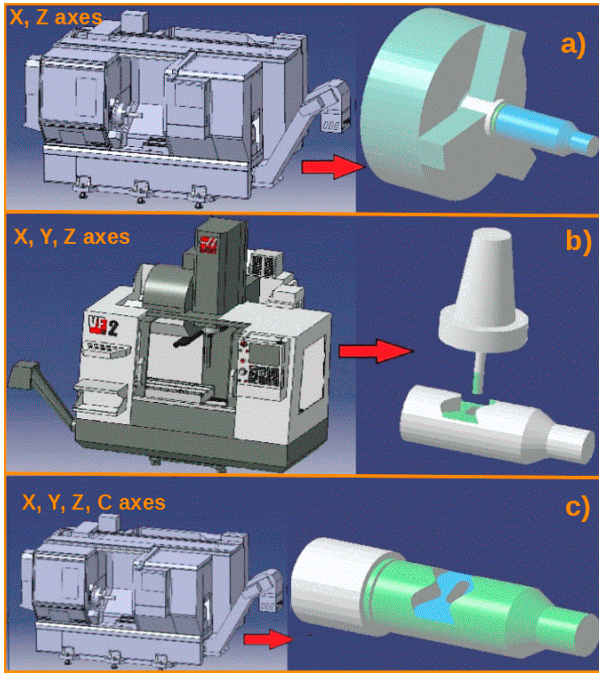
TTP vs. combined process (turning + milling): a) turning using lathe, b) milling, c) combined turning + milling using one machine tool.
